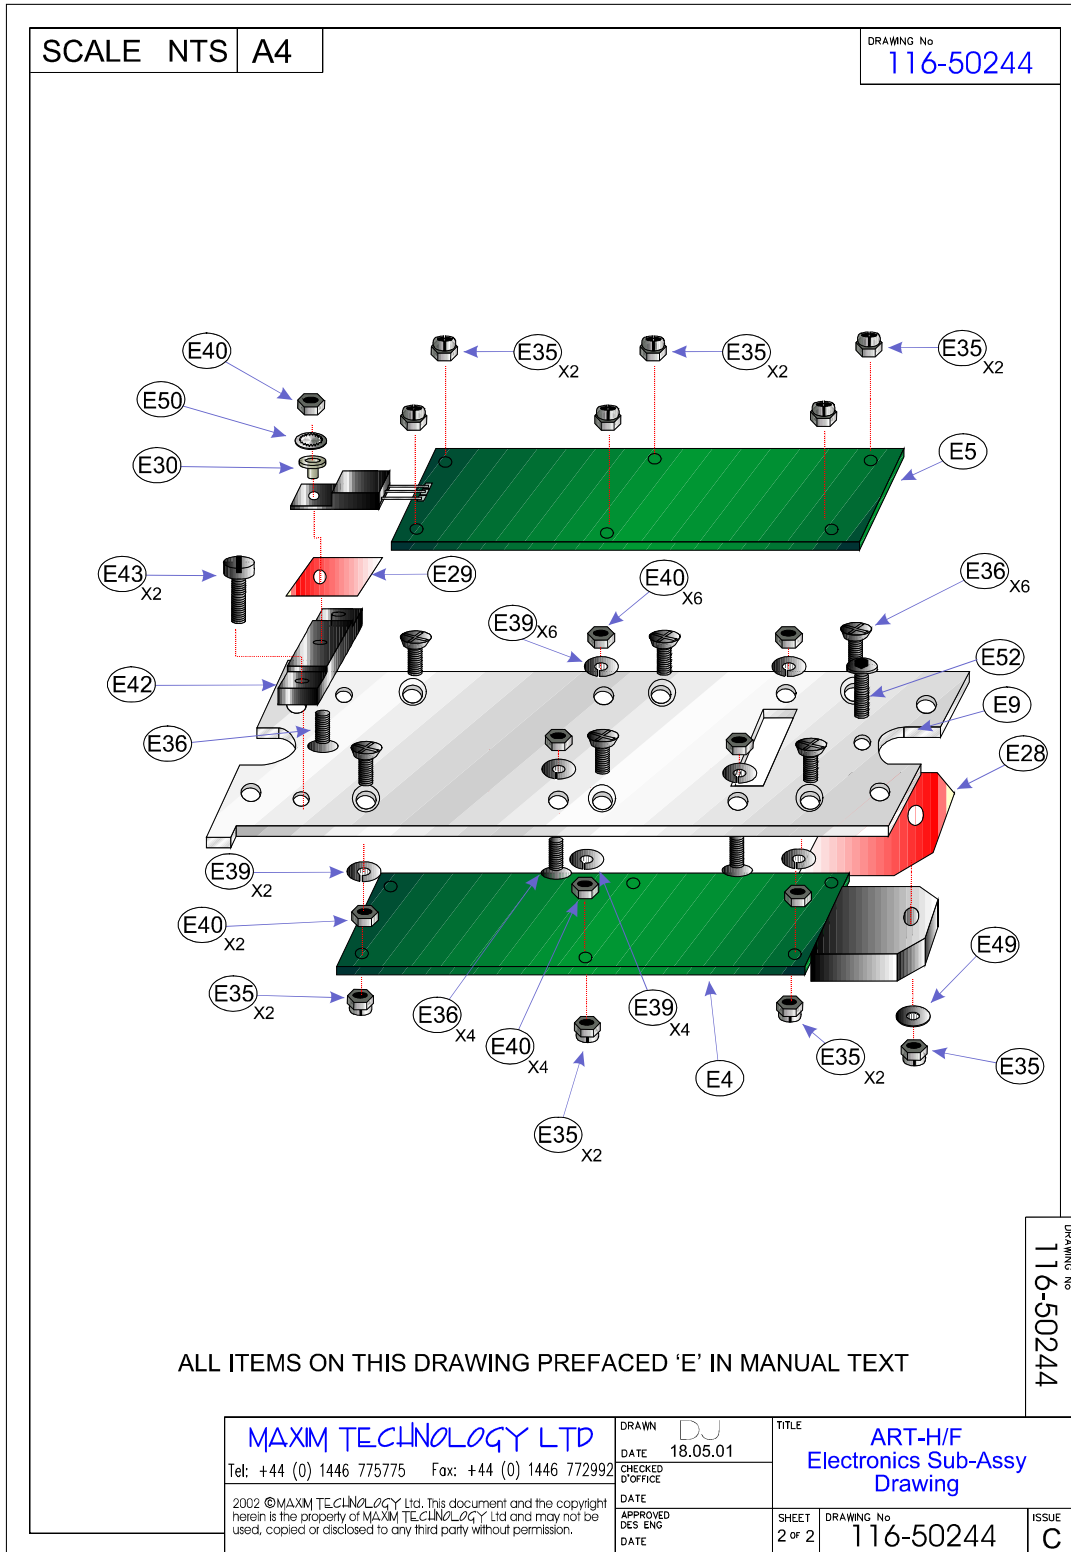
Exploded Assembly Drawing, Electronics, ART-H/F – 116-50244-C (2/2)
